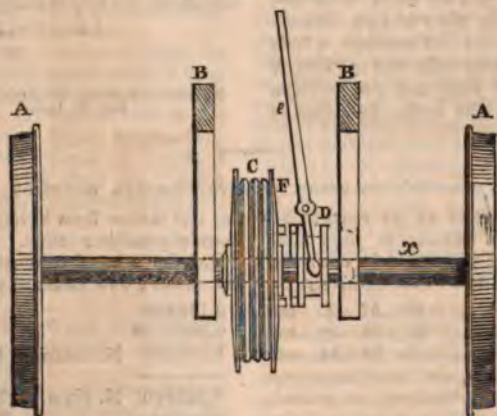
is a side view and section, and fig. 2 a front view. A, is the fore wheel of the carriage to be taken up, and
